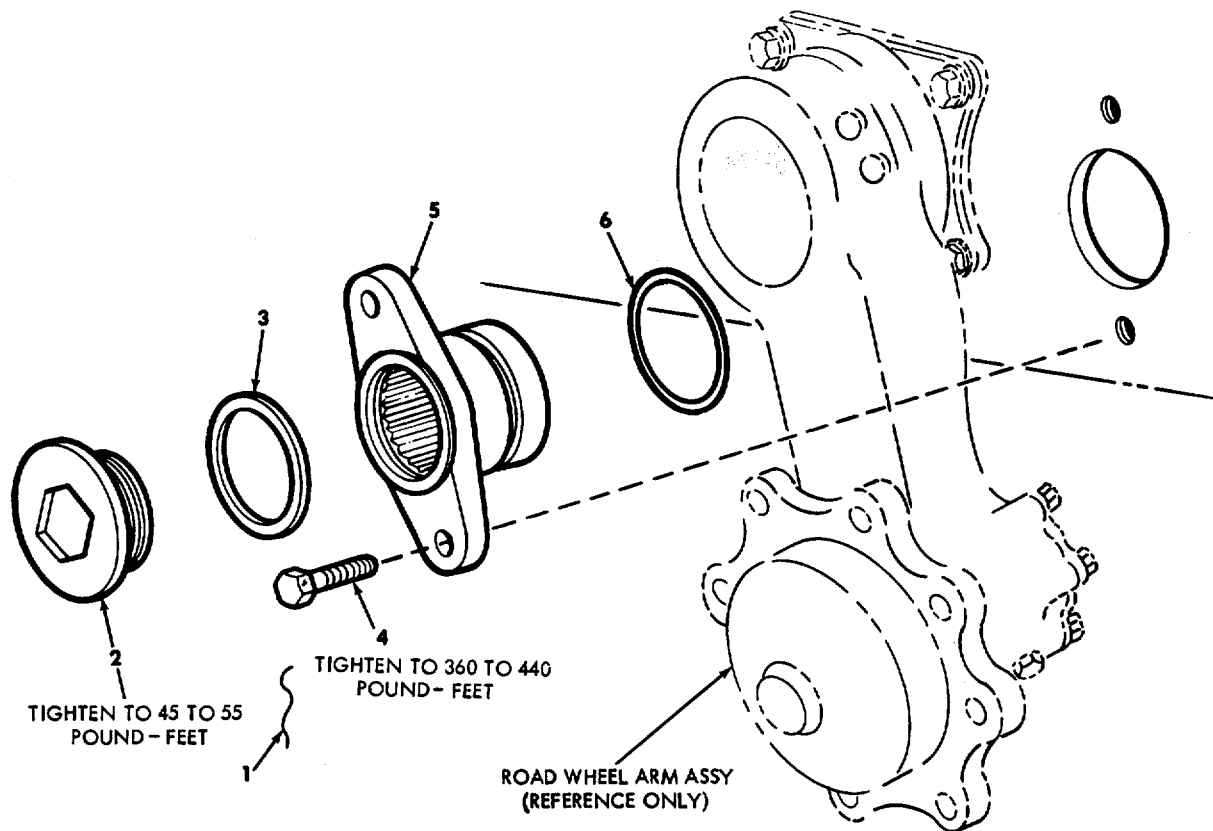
Removal/installation - torsion bar and road wheel arm assembly
